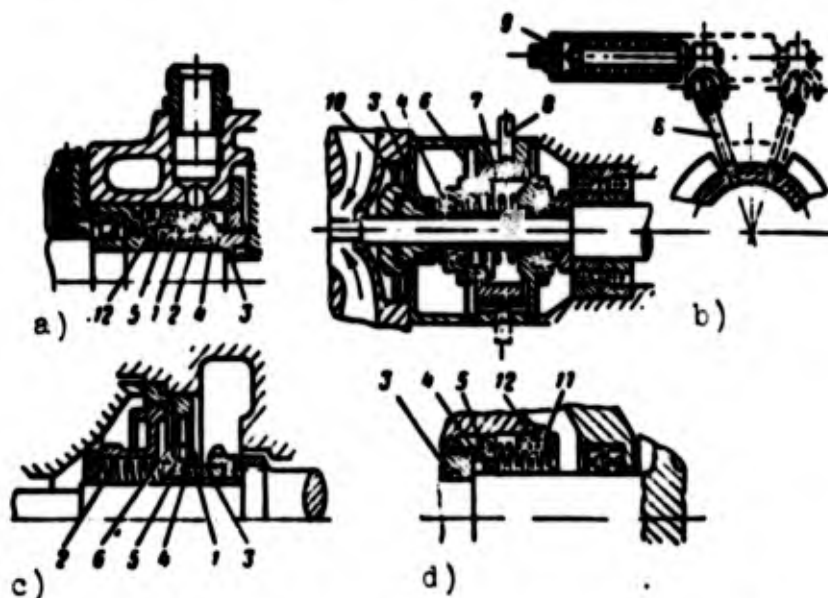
Face sealings: a) in combination with slot; b) with diaphragm; c) closed; d) with bellows; 1 - stop; 2 - spring; 3 - rotating ring; 4 - nonrotating ring; 5 - bushing; 6 - diaphragm; 7 - threaded bushing; 8 - guide; 9 - servomotor; 10 - hydro-lock; 11 - bellows; 12 - bushing.
